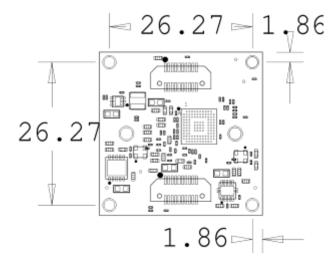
Rear Portion of See3CAM_CU135 Module Board mechanical dimensions
